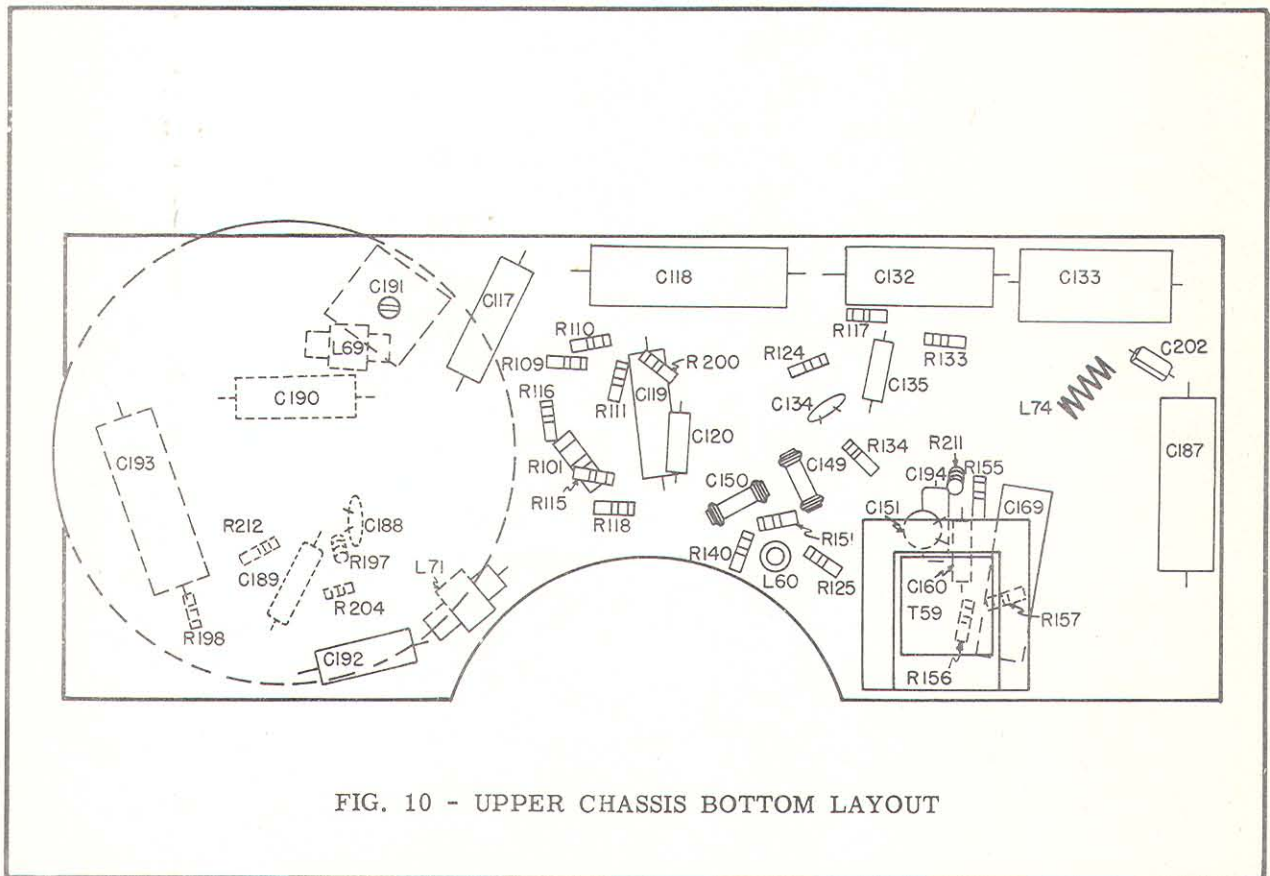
UPPER CHASSIS BOTTOM LAYOUT
